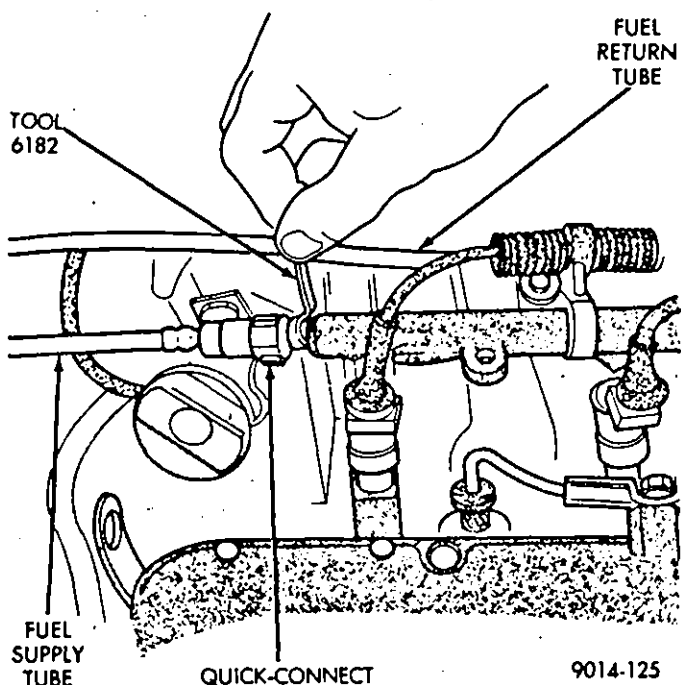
Fuel Tube to Fuel Rail Quick-Disconnect Tool—3.0L Engine
